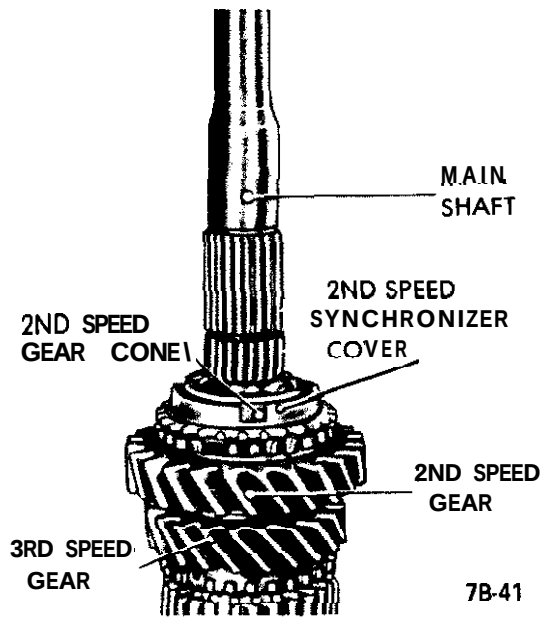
B-41 Second Speed Gear and Synchronizer Ring Installed
